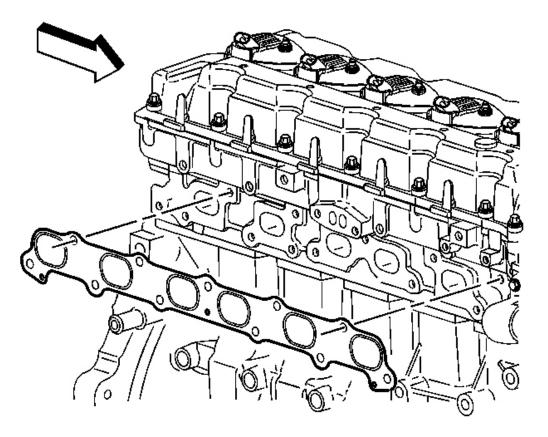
View Of Exhaust Manifold Gasket Courtesy of GENERAL MOTORS CORP.
